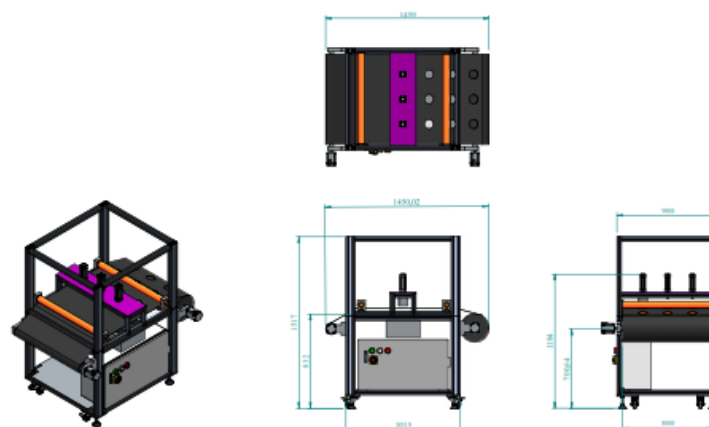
The Old Design of a Plastic Mulch Perforating Machine
